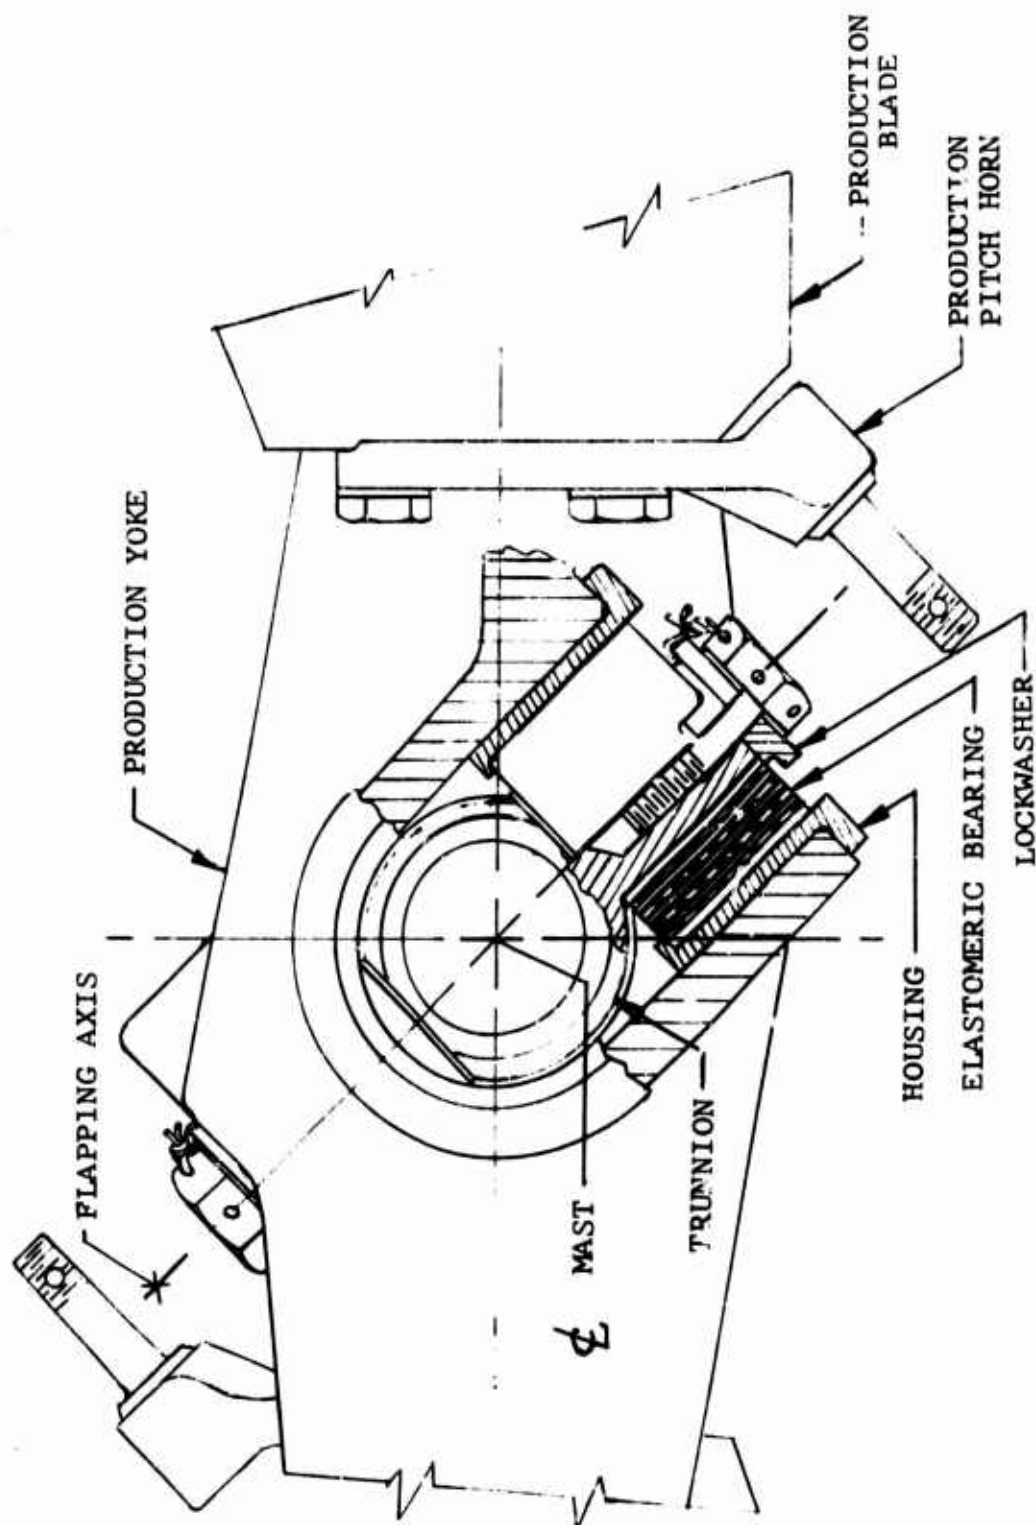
Elastomeric Bearing Flap Assembly - OH-58A Tail Rotor.
